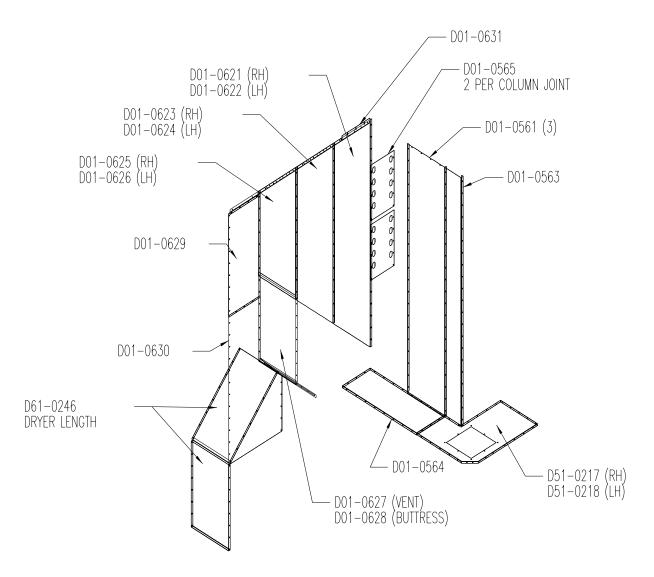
2012 and 2014 Inside Side Duct Assembly
